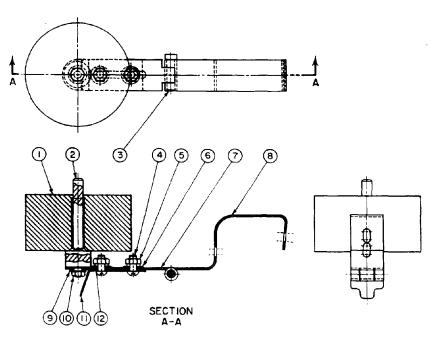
ASSEMBLY OF SCUFFING TEST FIXTURE
